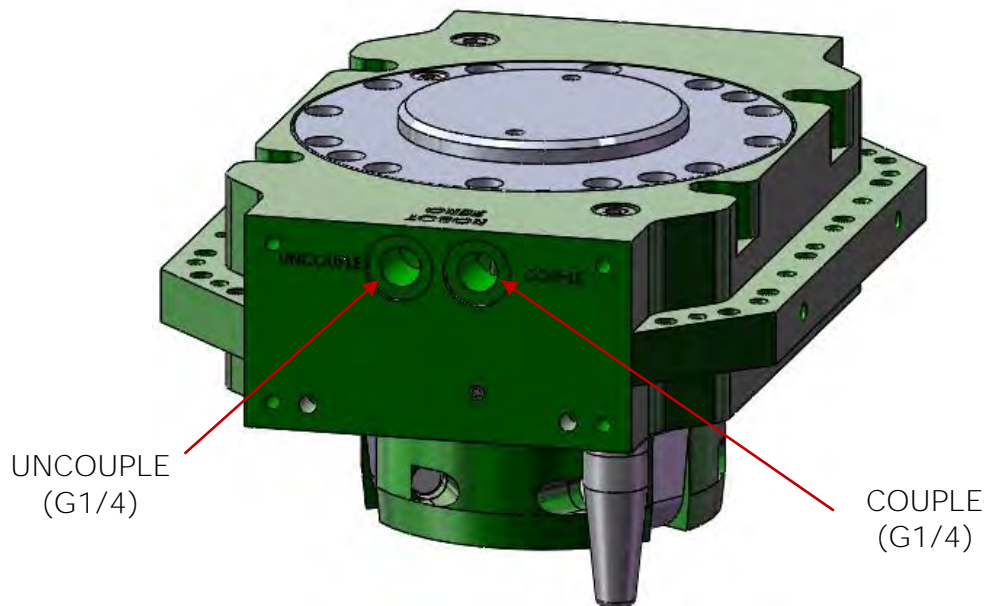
E125 Robot Adaptor Air Supply Ports
